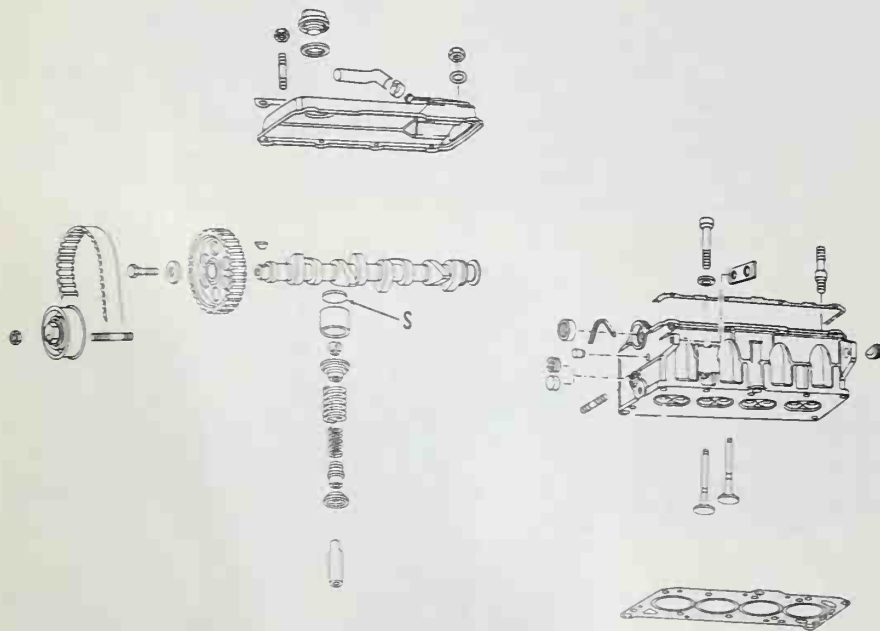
Exploded view of cylinder head assembly. Shim (S) adjusts valve tappet gap.
